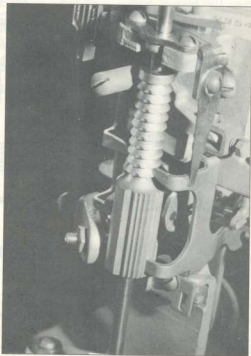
THE SHAFT HUB AND DOUBLE DOG
